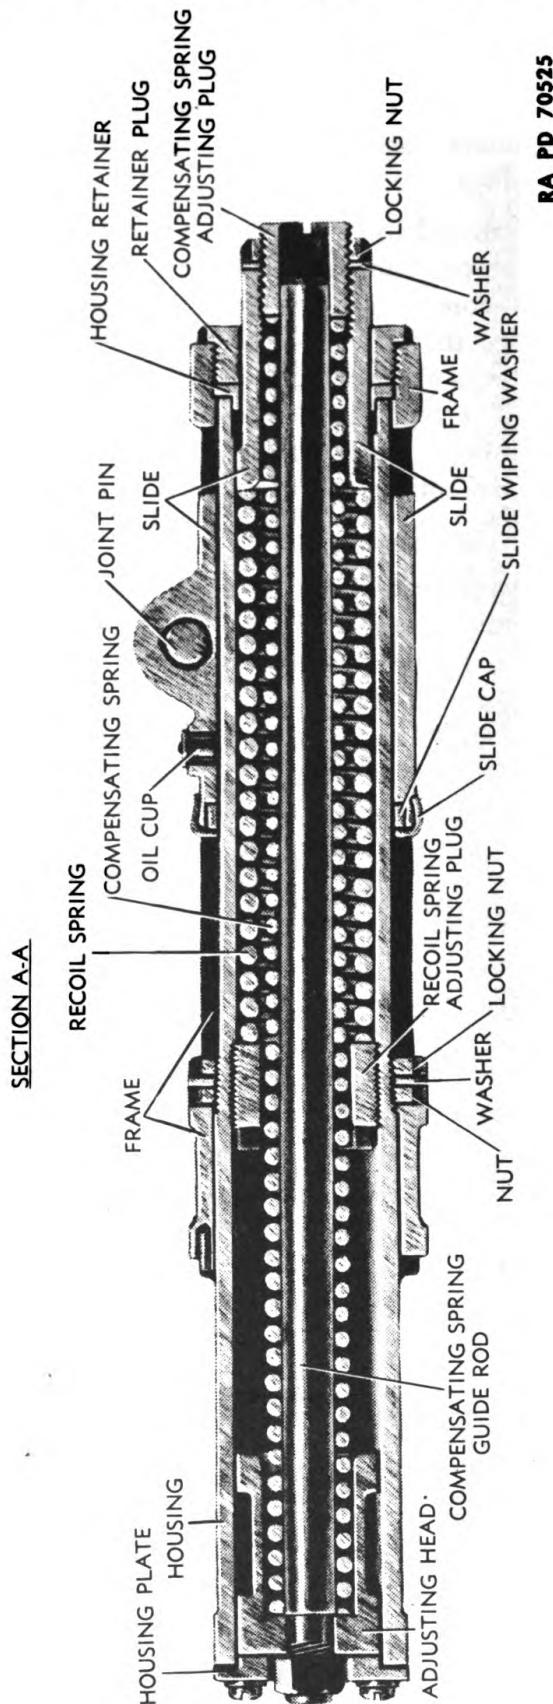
Lower Recoil Mechanism – Sectional View – A.A. Machine Gun Mounts, Cal. 50, M2 and M2A1
